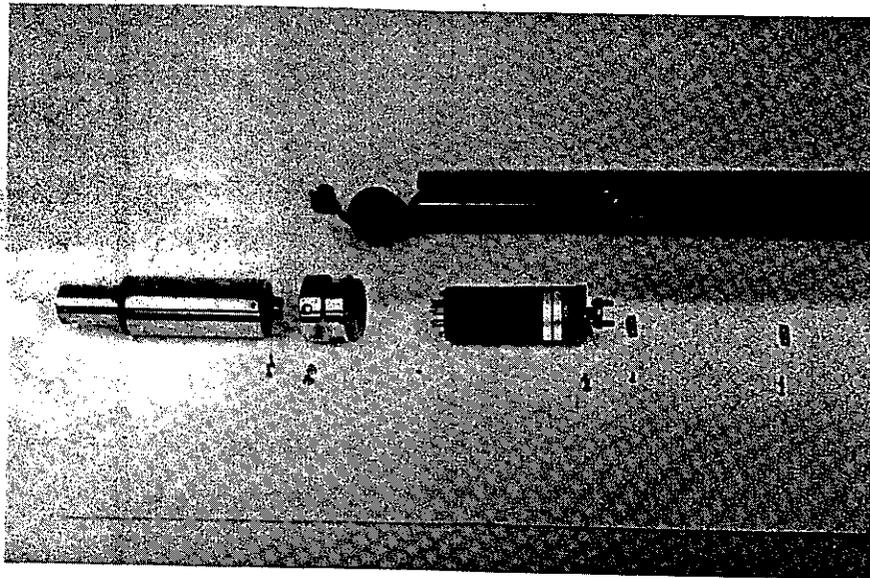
Assembly sequence for the lower portion of the inner probe. Note the moisture detection cylinder, octagonal ring nut, small set screw, power and control connectors for moisture detector and servo-motor, servo-motor, and wire bundle retainer clips.
